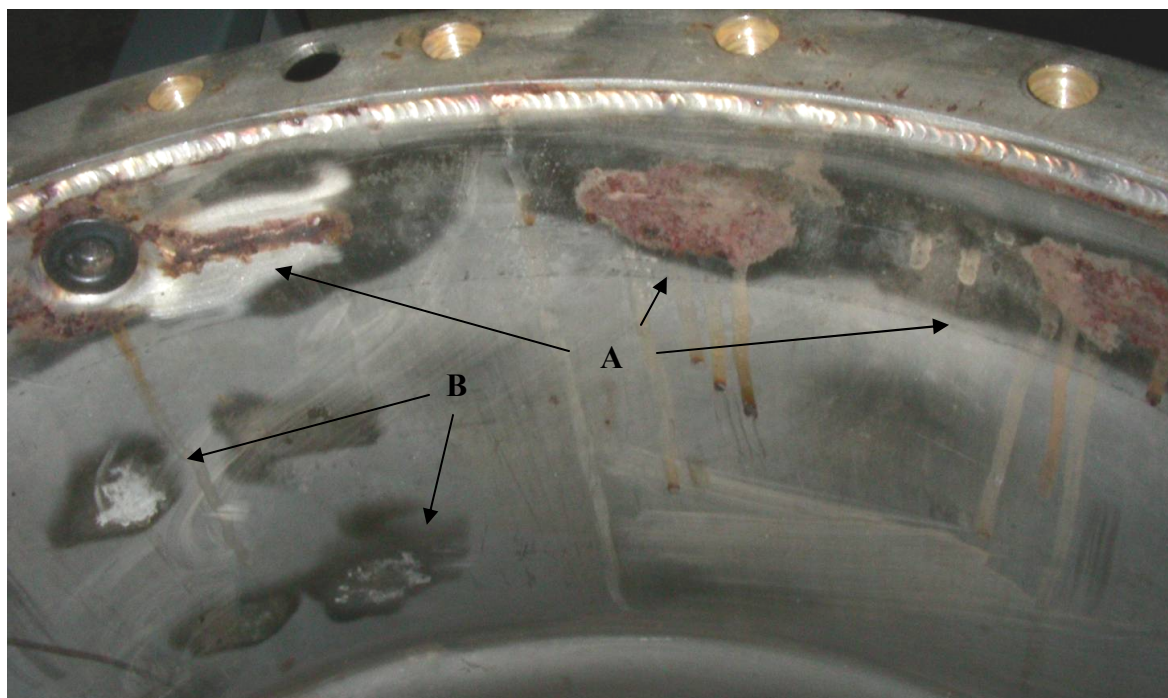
LE1 drum inner surface showing corrosion behind top flange stitch welds (A), and behind bar code plate attachment welds (B).
